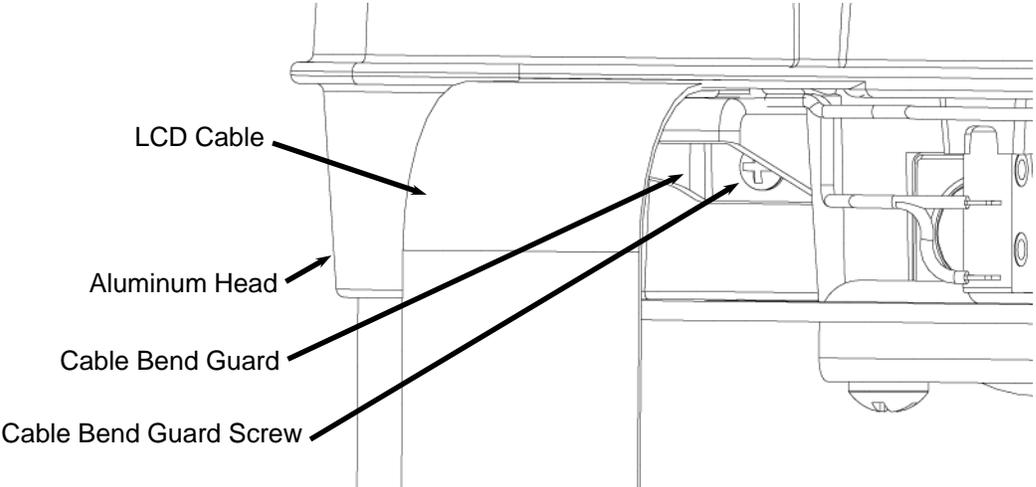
REMOVING THE TOP RIBBON CABLE BEND GUARD
